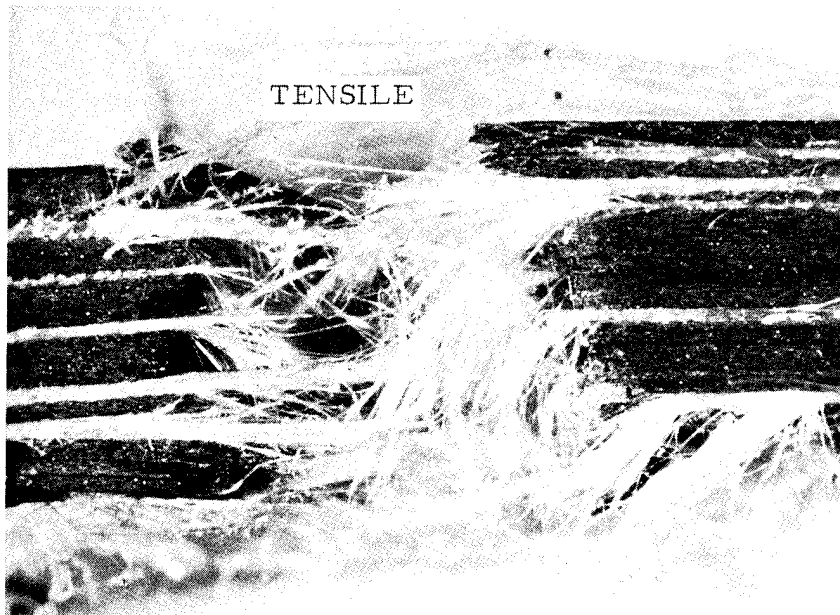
18X EDGE-VIEW OF IMPACT FRACTURE AREA OF PANEL #8 MODULITE 5206/PRD-49
